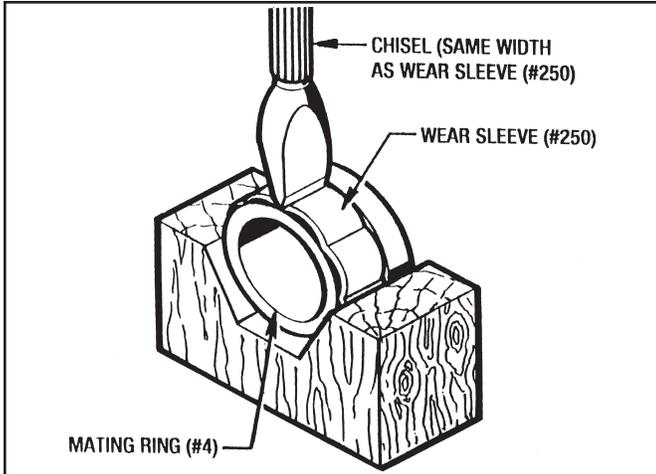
Wear Sleeve Removal (#20 Posidyne Only)
